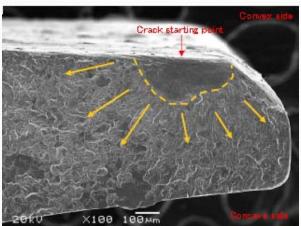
DETAILED INSPECTION-FRACTURE SURFACES
